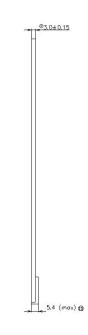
TFT-LCD Module Outline Dimension (Front View)
